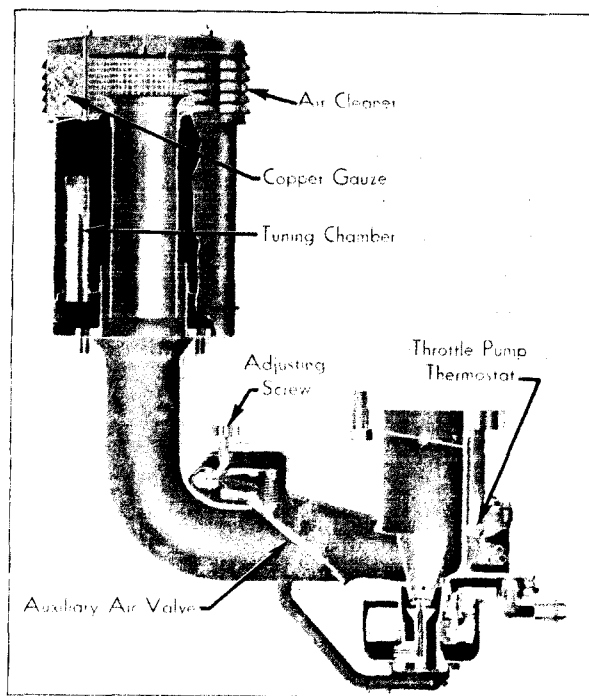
Sectional view of V-8 carburetor, intake silencer and air cleaner
